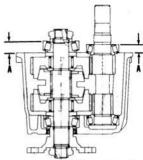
Measure (A) between top of front bearing races and case mating surface to determine shim thickness as outlined in text.
